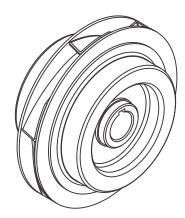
Fabricated Impeller, SNB and SNK pumps
